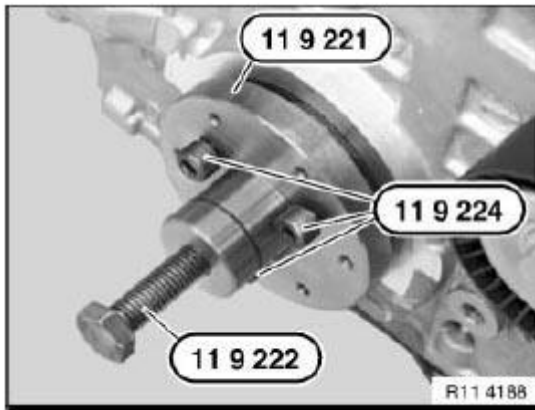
Identifying Special Tool (11 9 222) (11 9 224) And (11 9 222)
